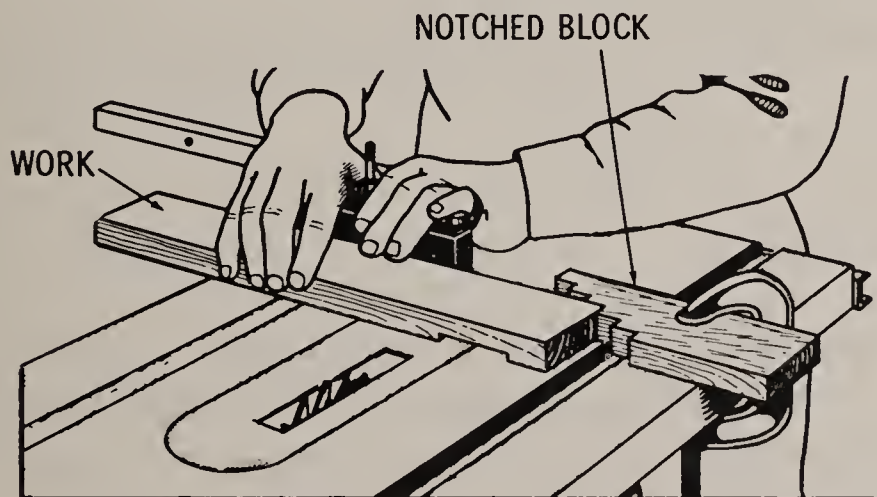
Method of using gauge block when cutting several wide grooves or tenons to size.
